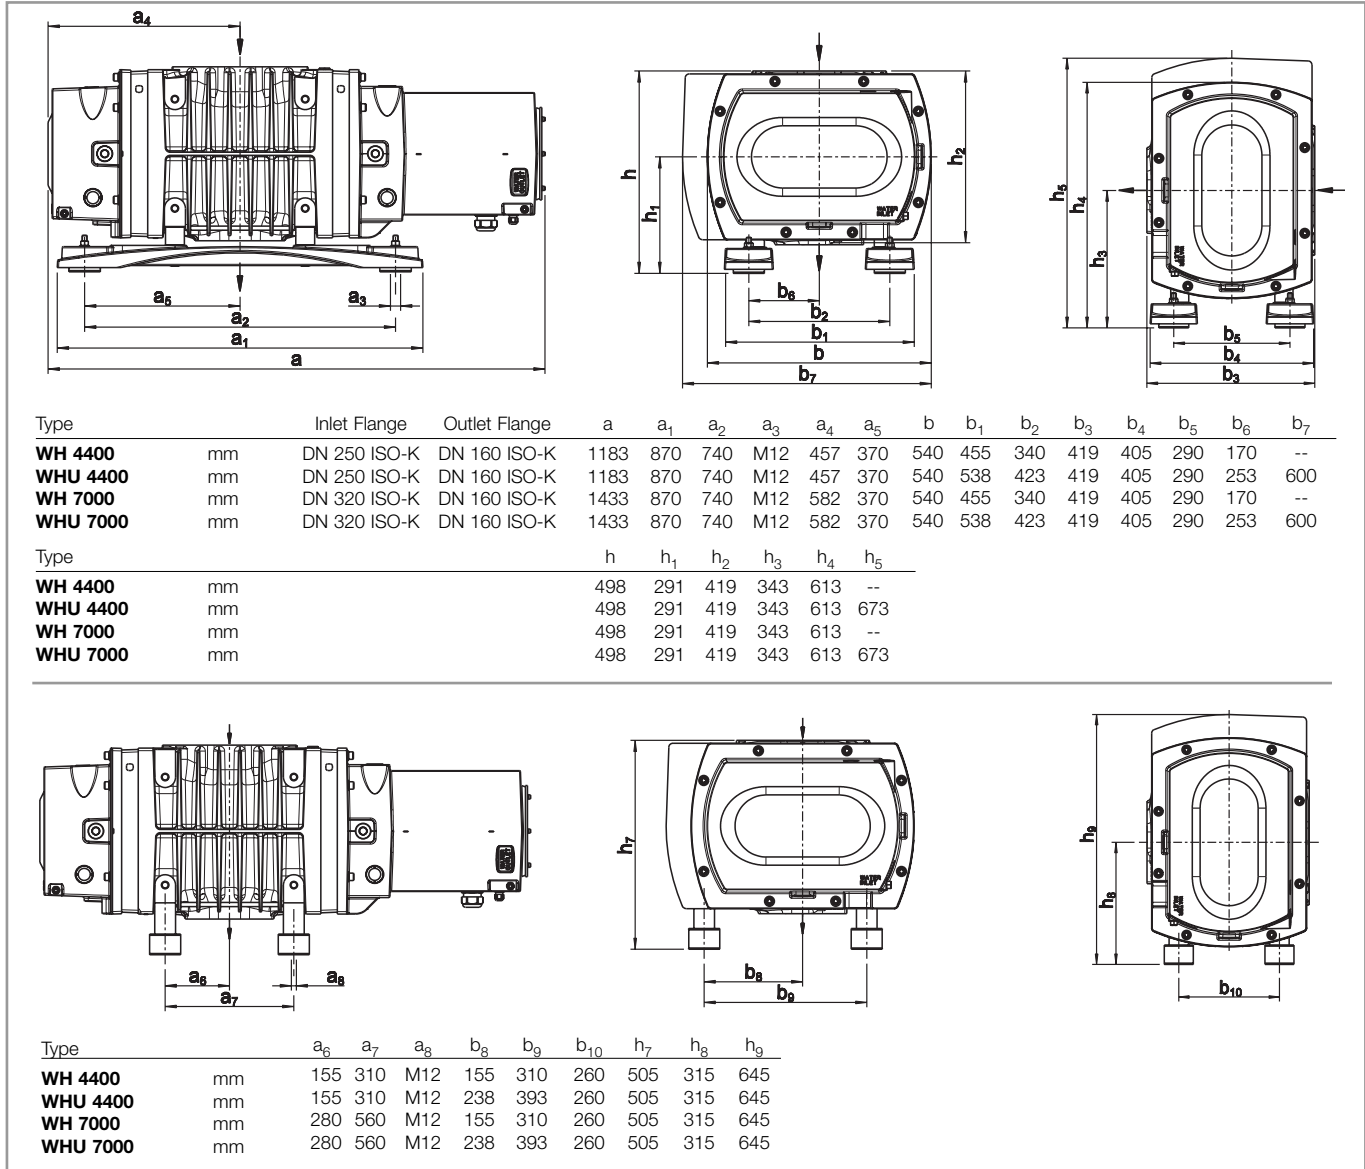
Dimensional drawing for the RUVAC WH/WHU
